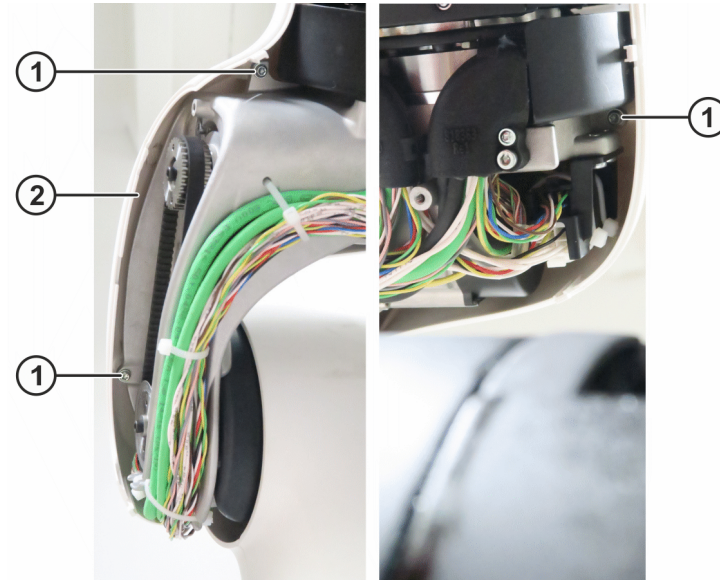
Fastening of the second shell to the arm at axis 4
